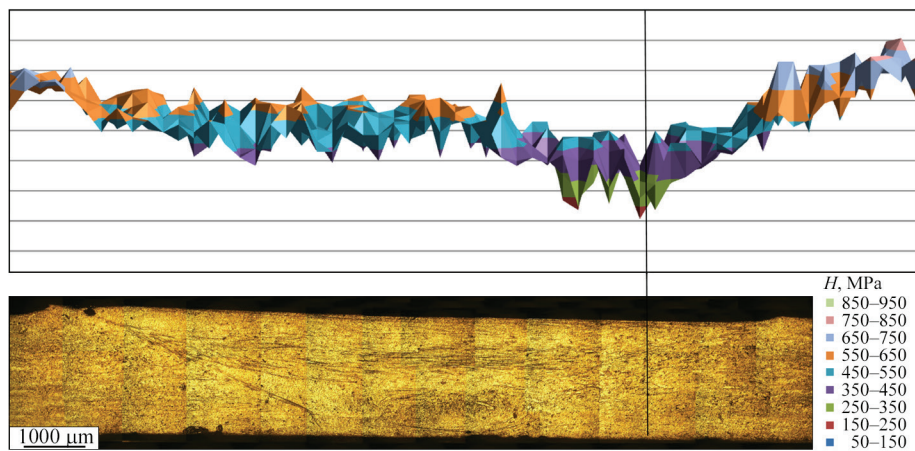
Metal microhardness in different zones of FS welded joint of 2 mm MA2-1M alloy produced at welding speed of 14 m/h
